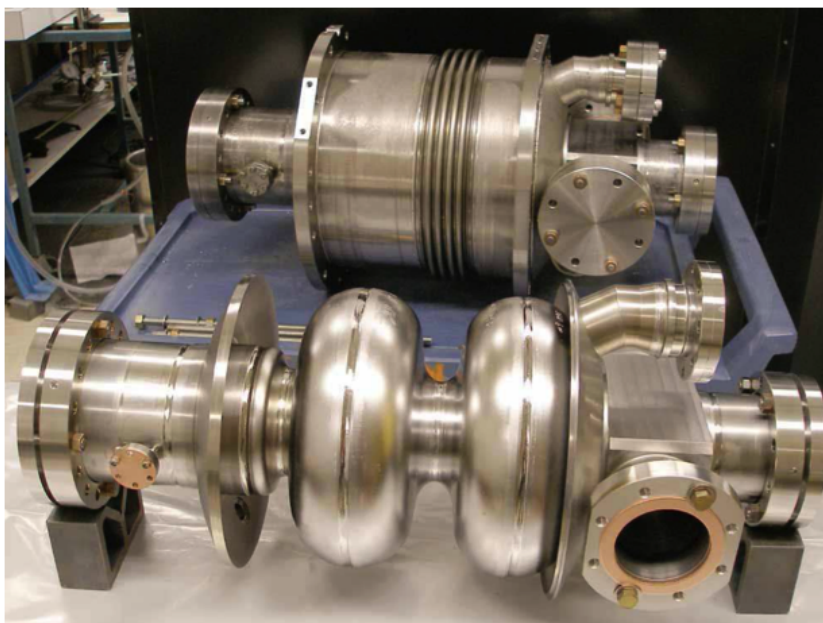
2-cell cavity before and after welding the helium vessel
